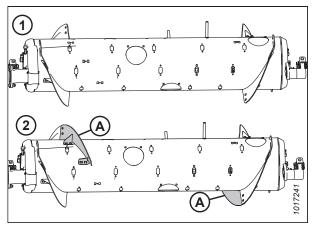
Auger Configurations – Rear View 1 - Wide Configuration 2 - Medium Configuration
